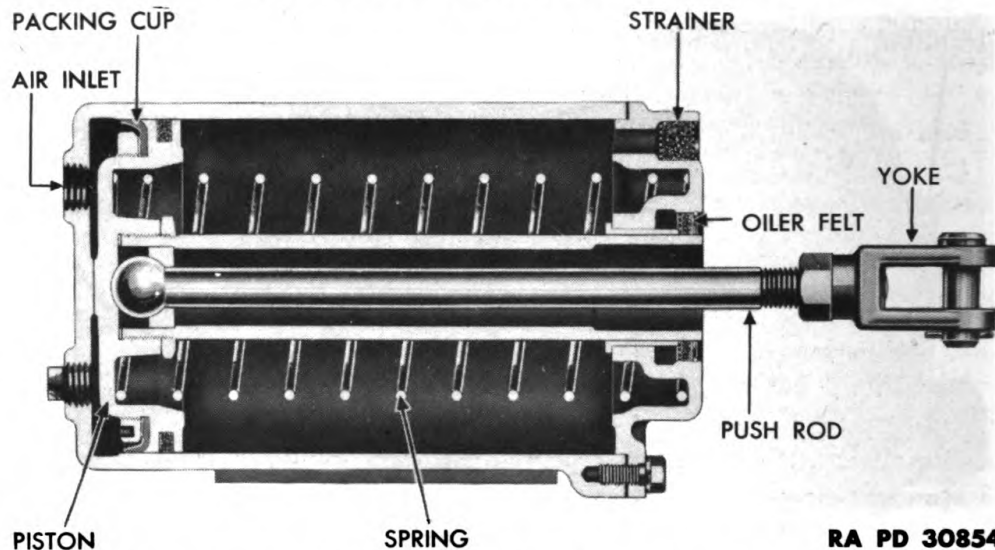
Sectional View of a 6-inch x 8-inch Brake Cylinder
